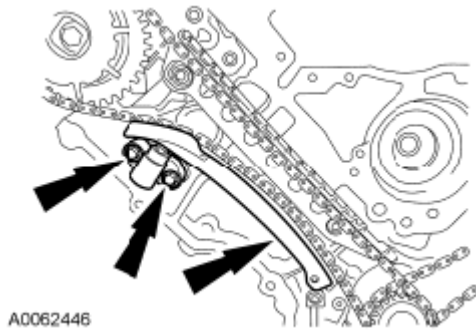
Locating RH Timing Chain Tensioner And Tensioner Arm Bolts
